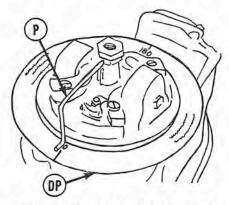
Synchronizing tool installed for adjusting the magneto points. Refer to text for details.
